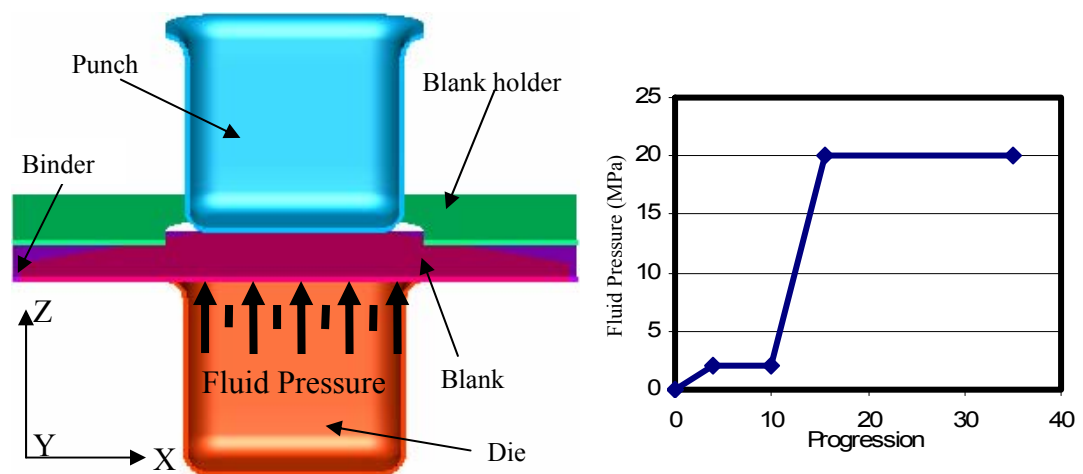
Hydro-mechanical deep drawing (Aquadrawing) process setup and counter pressure exerted by fluid on to the workpiece
